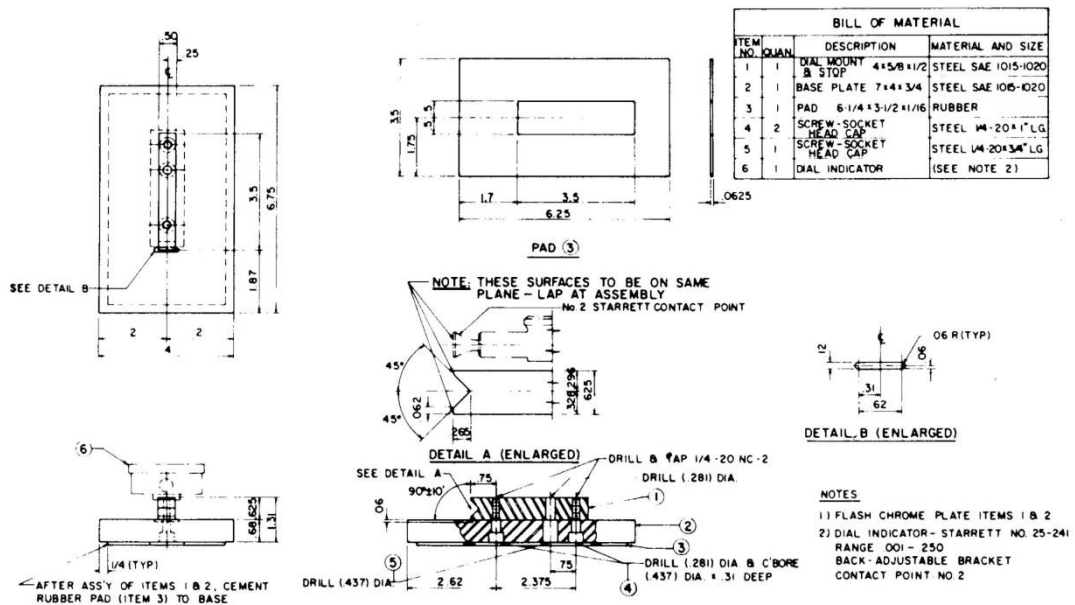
Assembly and Details for Lateral Expansion Gauge
